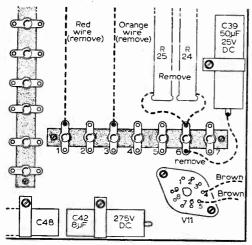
The relevant section of the chassis showing wiring and components to be altered.
